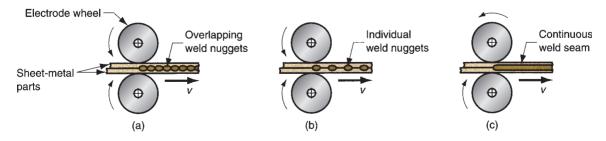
Different types of seams produced by electrode wheels: (a) conventional resistance seam welding, in which overlapping spots are produced; (b) roll spot welding; and (c) continuous resistance seam.
